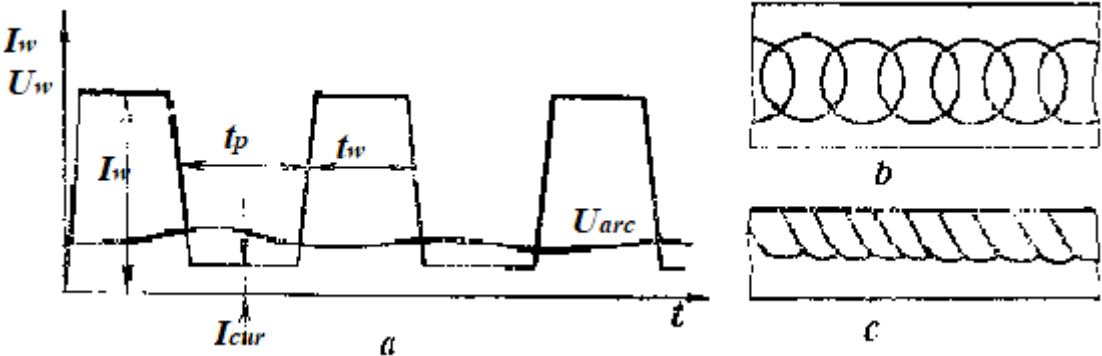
Change in welding current and voltage during pulse welding with a tungsten electrode (a) and appearance of the welds (b, c):
